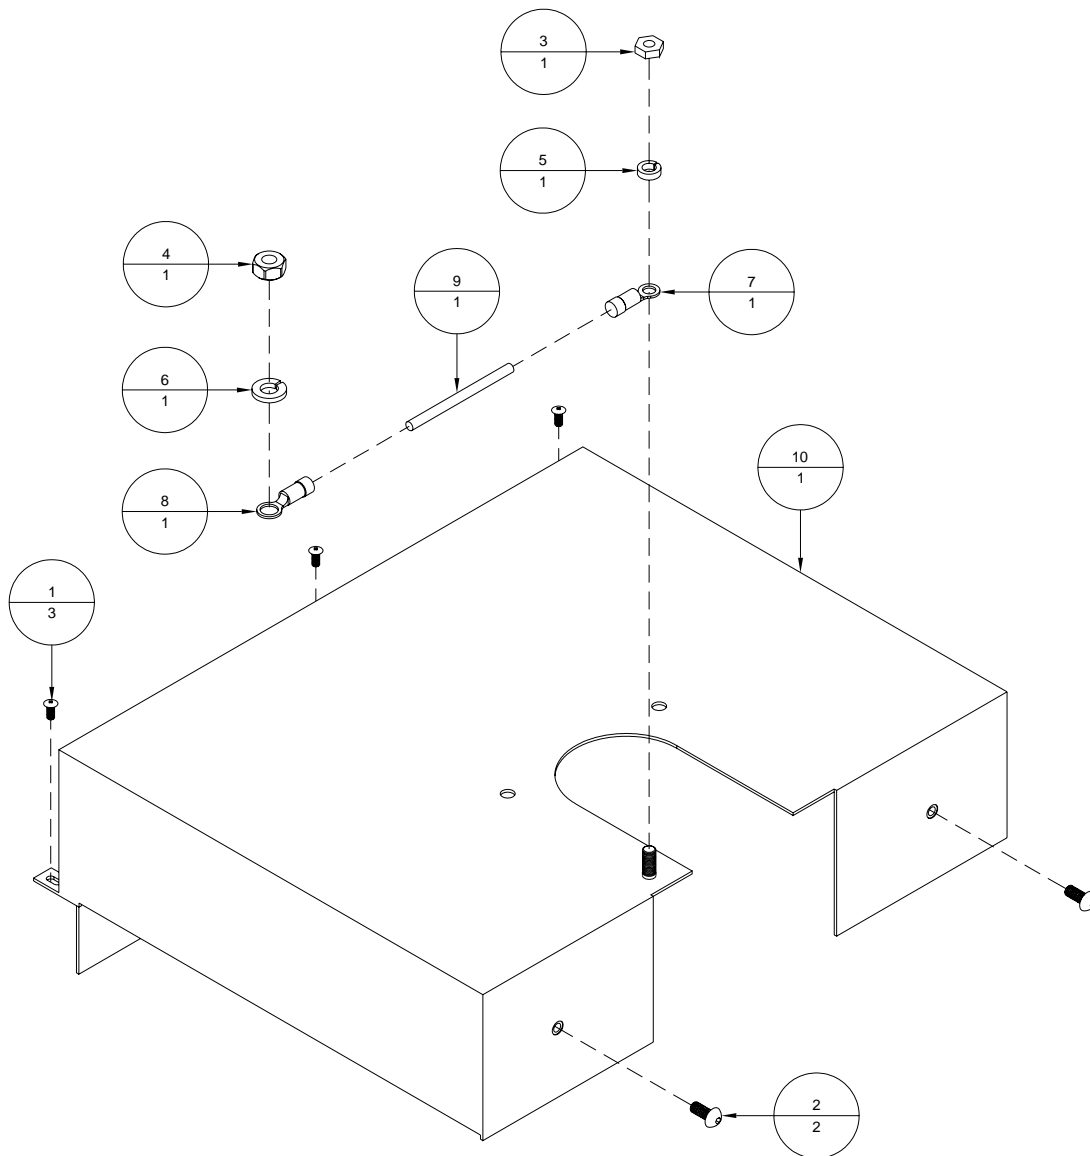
Cover Assembly, Backplane Guard, Single (9103114A)
